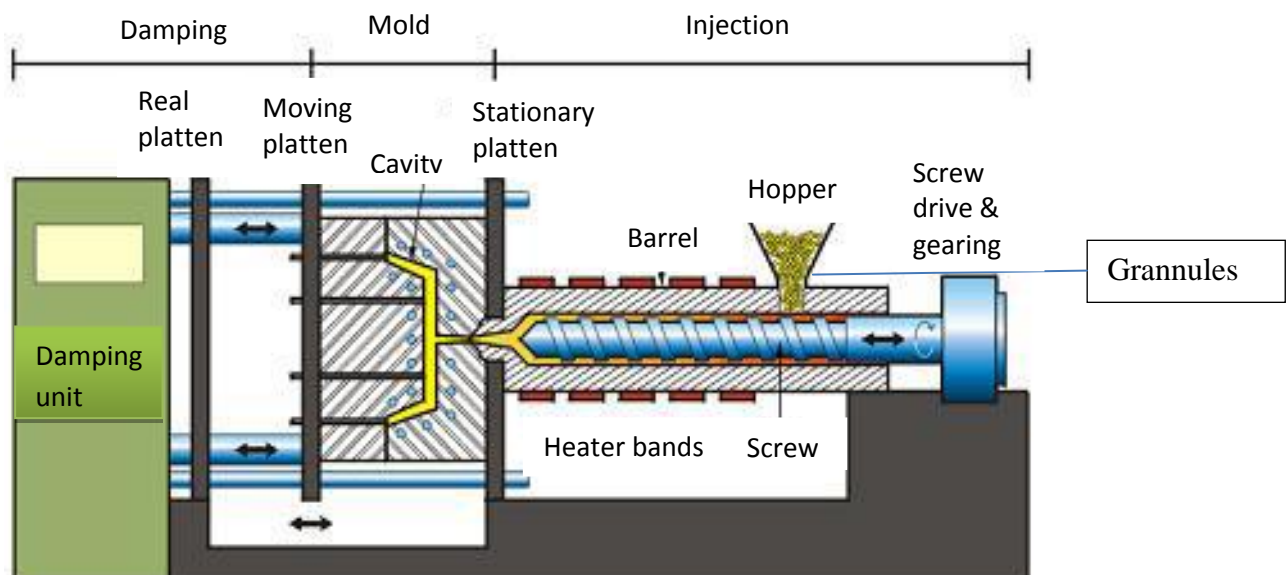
Schematic of Single Screw Injection Moulding Machine
